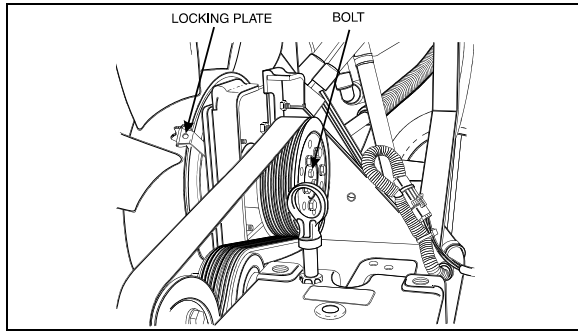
MECHANICAL LOCKING DEVICE 05061
